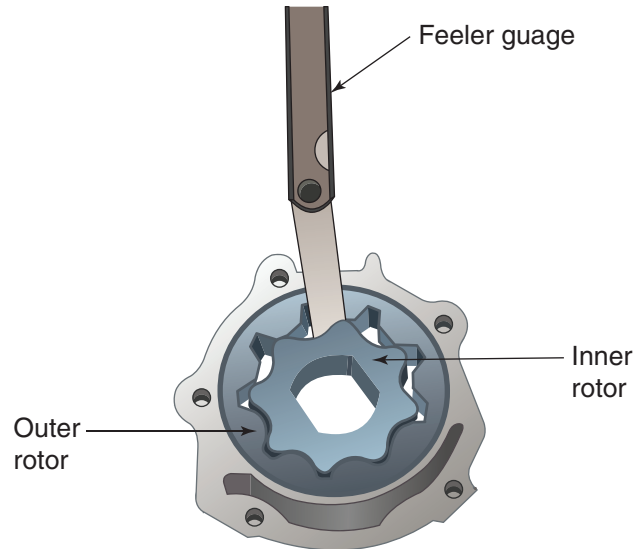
Measuring clearance between the inner and outer rotor lobes.
